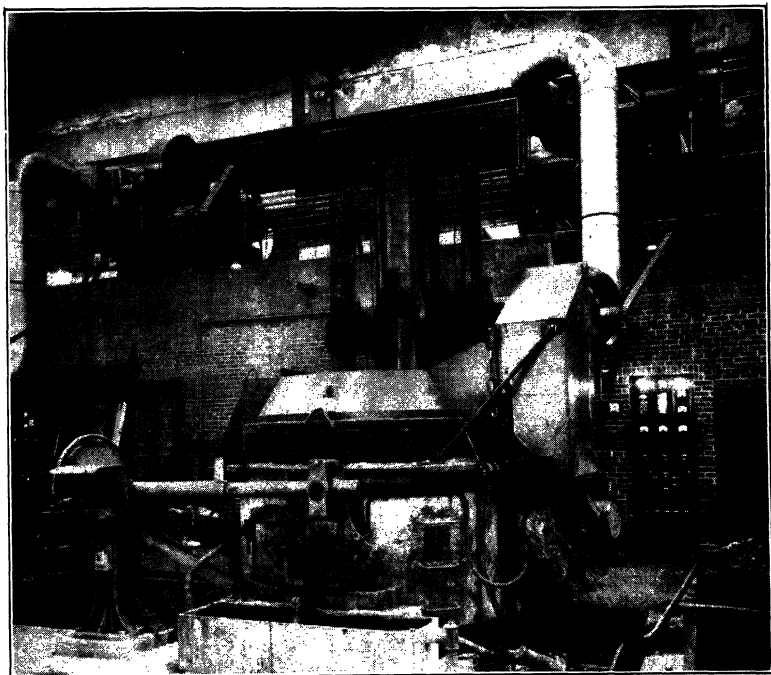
Local Hood on Furnace Shown in Figure 138 (*Courtesy American Air Filter Co.*)
